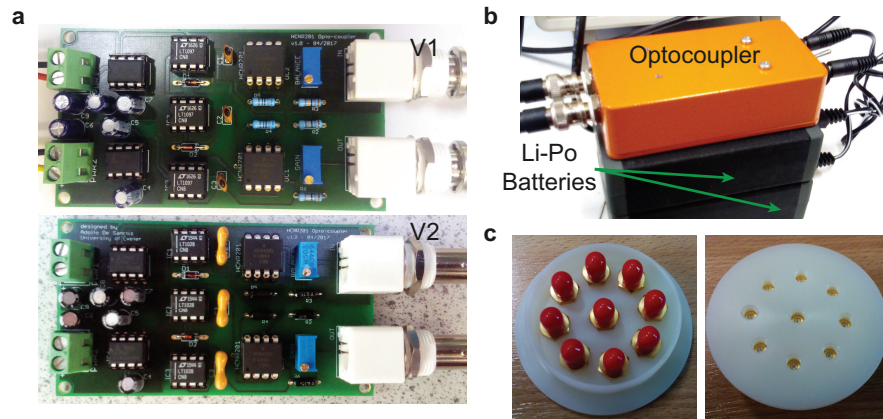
PCBs and construction of the optocouplers. a, Assembled PCBs of the V1 (top) and V2 (bottom) optocouplers. b, Prototype enclosure and wiring. c, Custom-built PET vacuum flange with SMA connectors.
